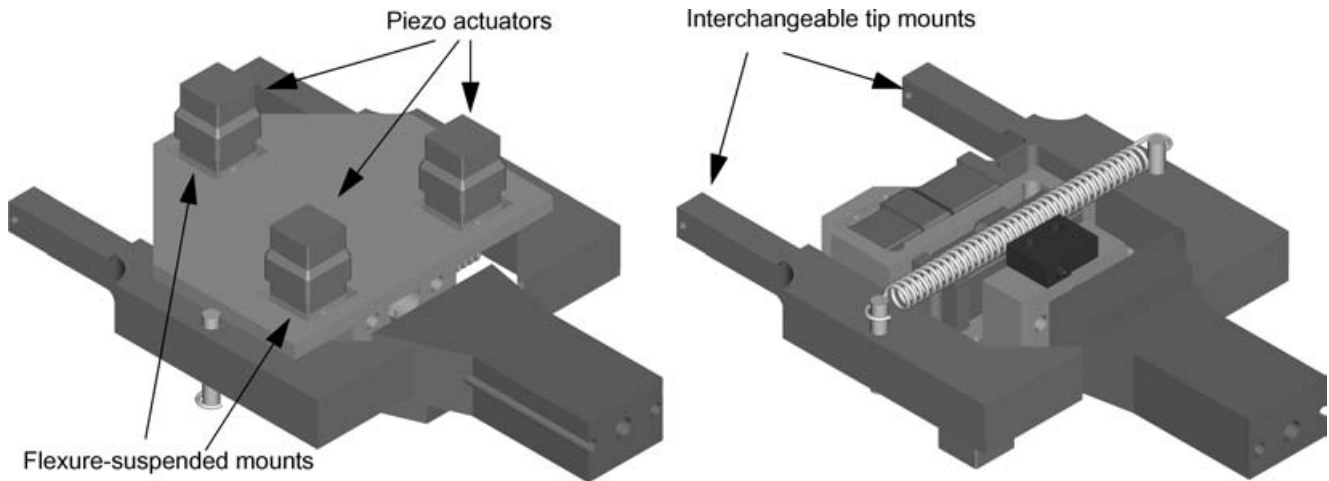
Bottom and top cad views of the micro/macro gripper.
